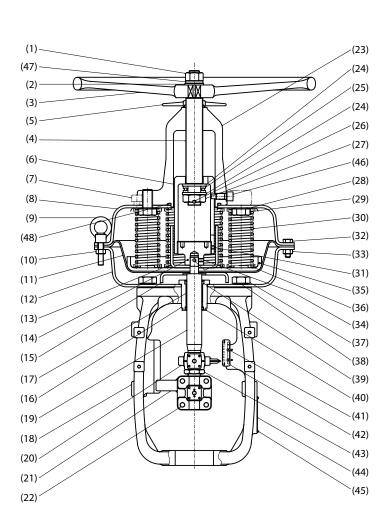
Model HA2/3 Actuator with Top Handwheel (Reverse Action Type)
